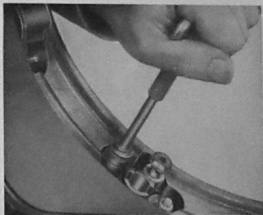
Tightening Self-Locking Nuts Onto Cylinder Studs
